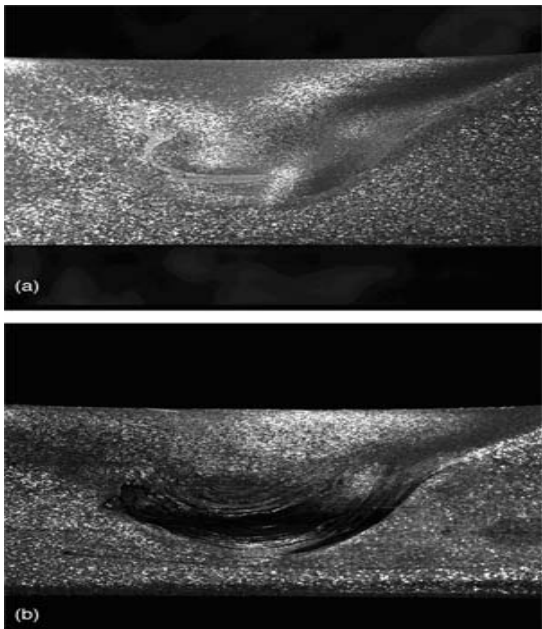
Cross sections showing fully consolidated weld zone. FSRP zone is 3/8-in (9.52 mm) thick: (a) SiO₂ and (b) TiO₂.
